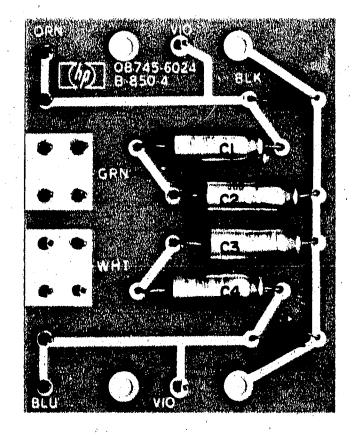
A5 Bias Filter Assembly Component Identification Serial Numbers Prefixed 906- and Above
